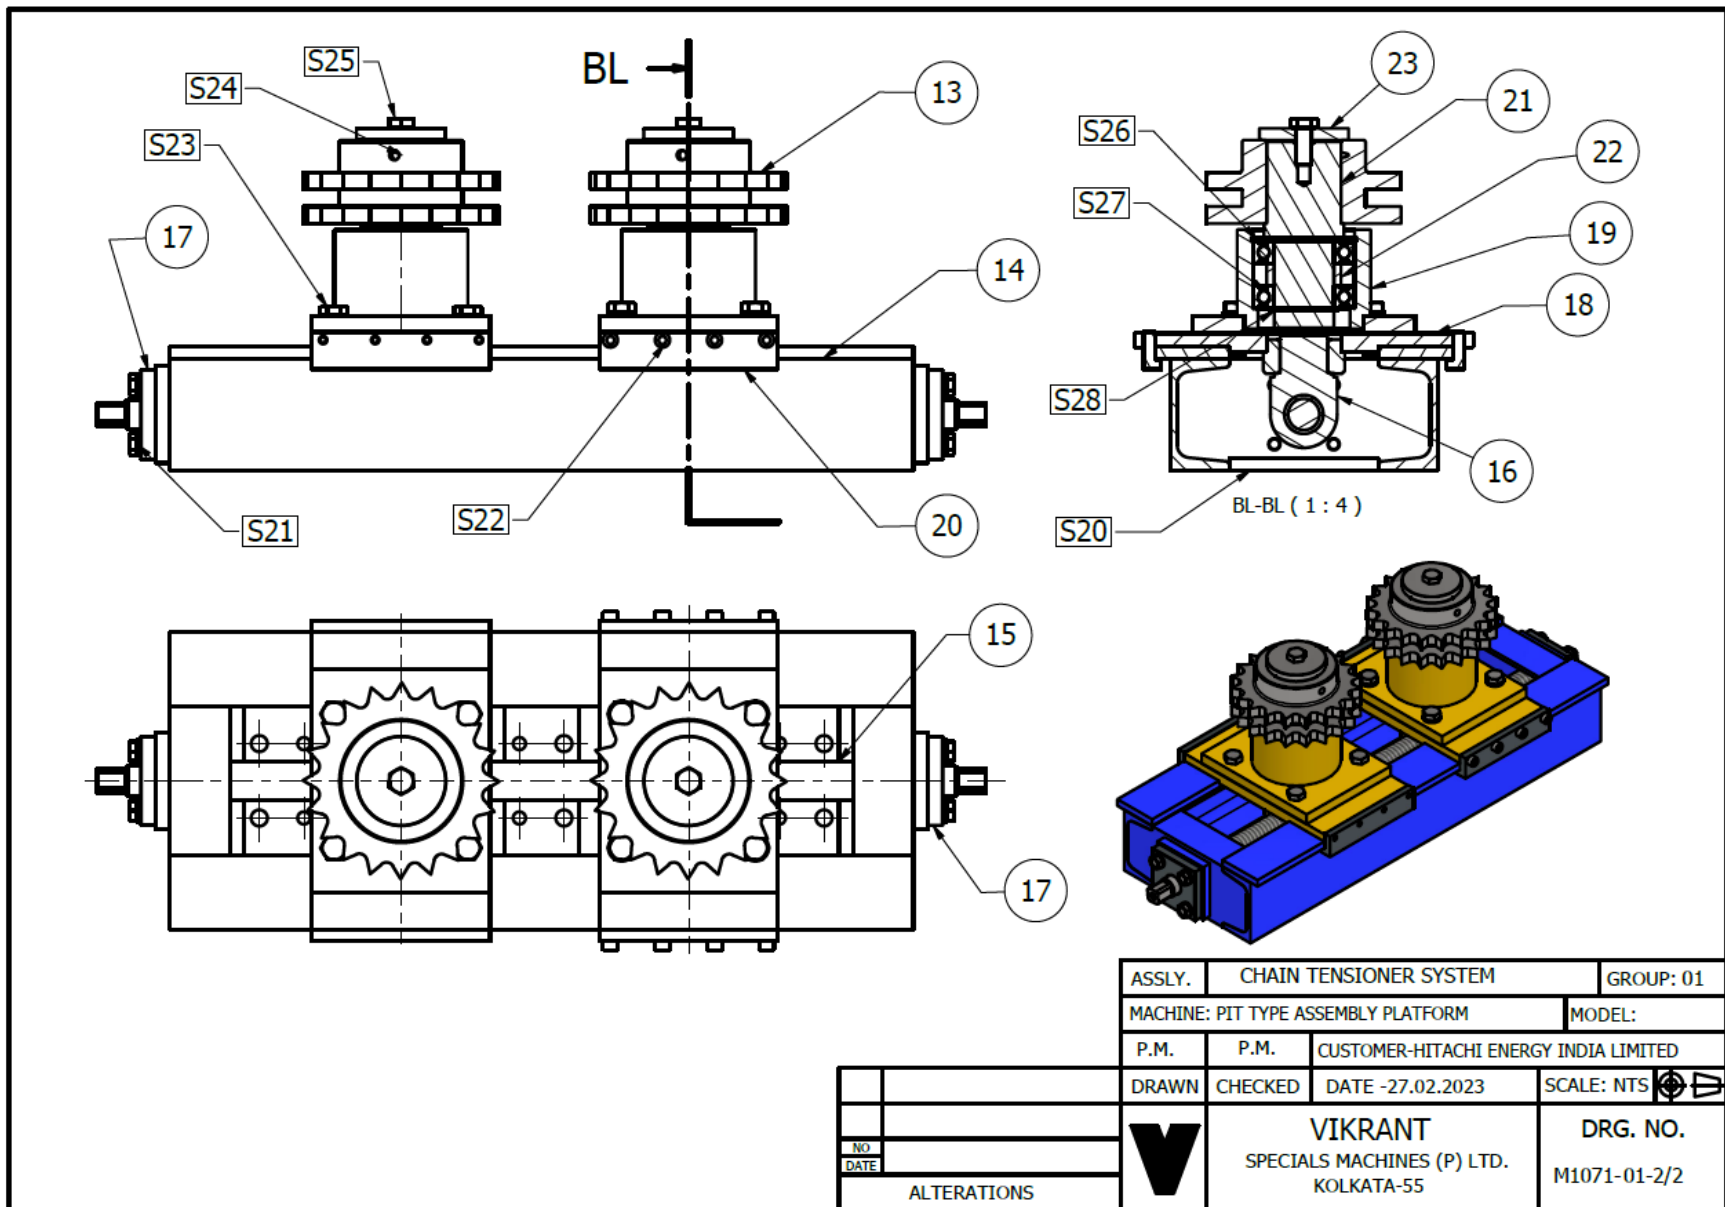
(f) Assembly drawing of Chain Tensioner System
